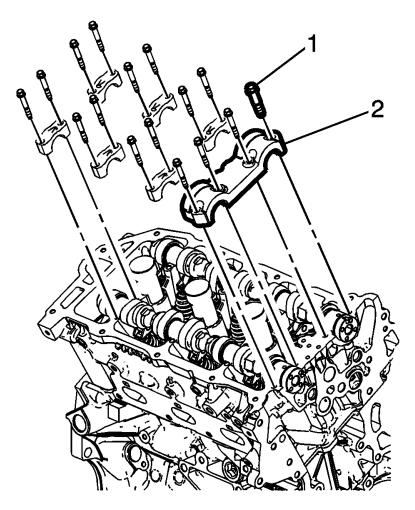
Camshaft Bearing Caps And Bolts Courtesy of GENERAL MOTORS COMPANY
